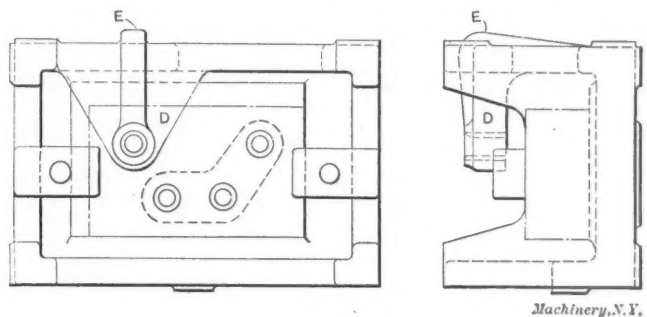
Modification of Jig in Fig. 91, which practically brings it into the Class of Open Drill Jigs.
